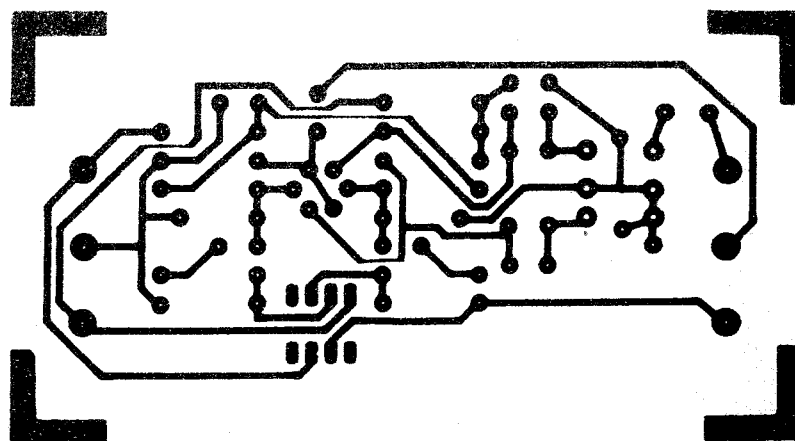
PCB MASK FOR THE DISCRETE COMPONENT CIRCUIT
